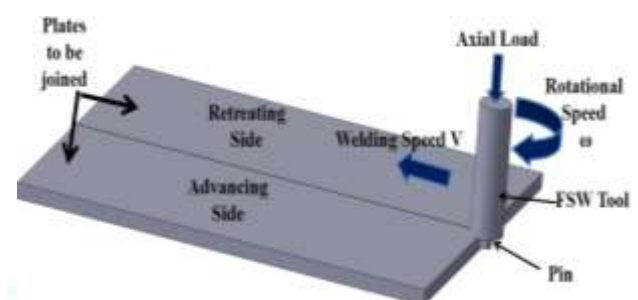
This figure shows friction stir welding process by using a rotating tool which moves in the direction of joined edges of plates [7].
